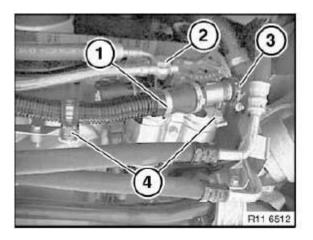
Identifying Hose Clip, Hose And Banjo Bolt Courtesy of BMW OF NORTH AMERICA, INC.
